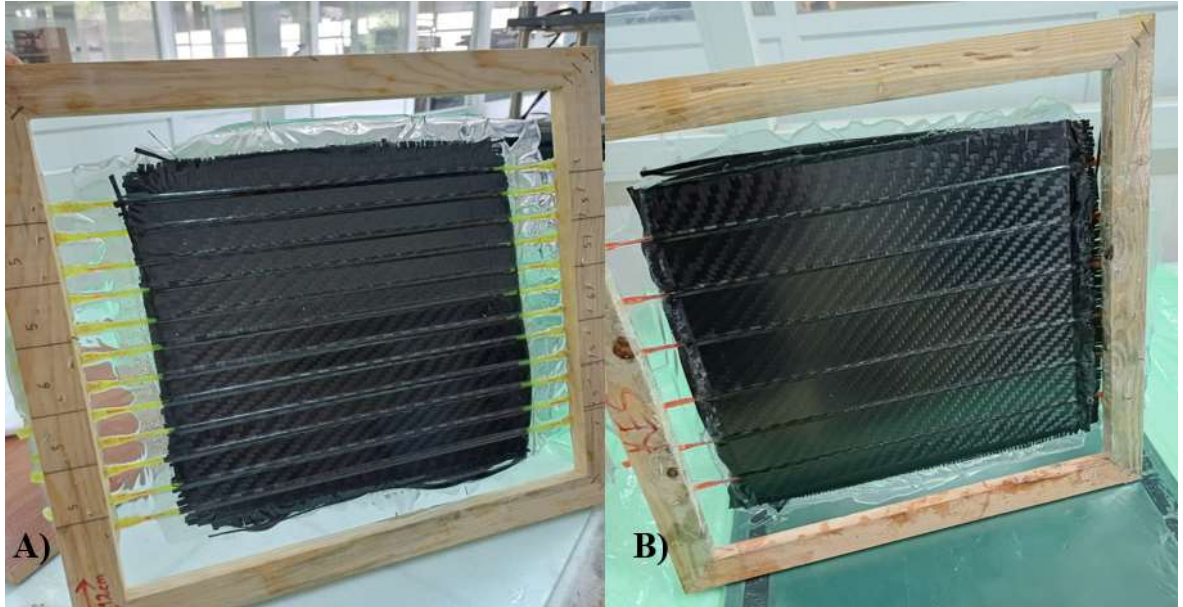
(A) Appearance of the bending test laminate with square cross-section channels after demoulding. (B) Appearance of the impact test laminate with star-shaped cross-section channels after demoulding
